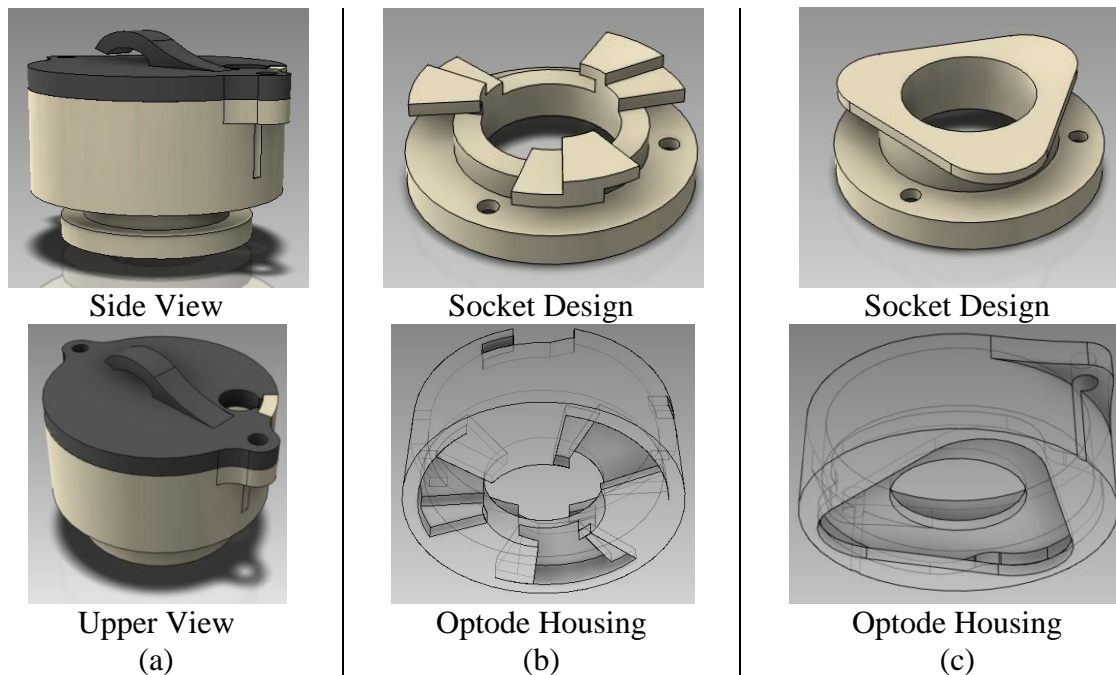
Optode housing design for a PCB of  $\sim 2$  cm in diameter: (a) Optode stabilized on the head by a small lip that helps jam the optode due to the applied pressure of the cap without a socket, (b) First socket and corresponding optode design with angular interlocking lips, (c) Second optode and corresponding housing design for a better interlocking mechanism
